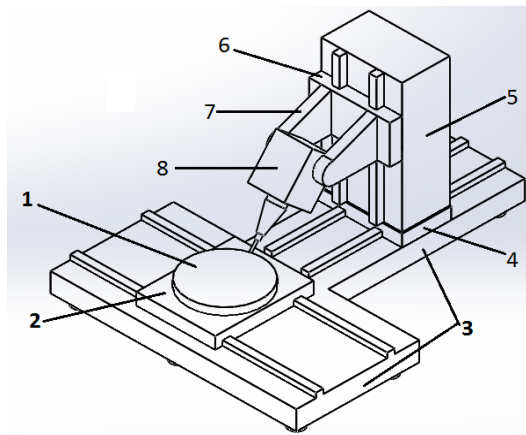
3D drawing of 5-axis desktop CNC machine.
